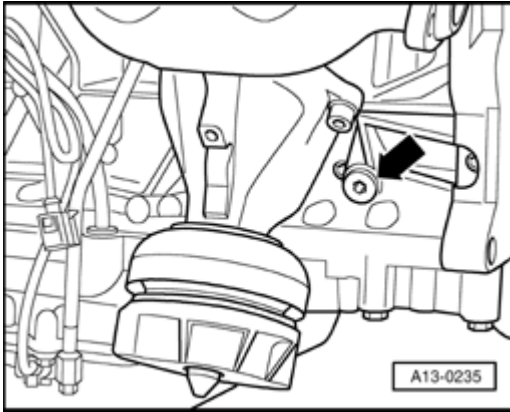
Removing Locking Bolt Of TDC Marking At Upper Part Of Oil Pan
